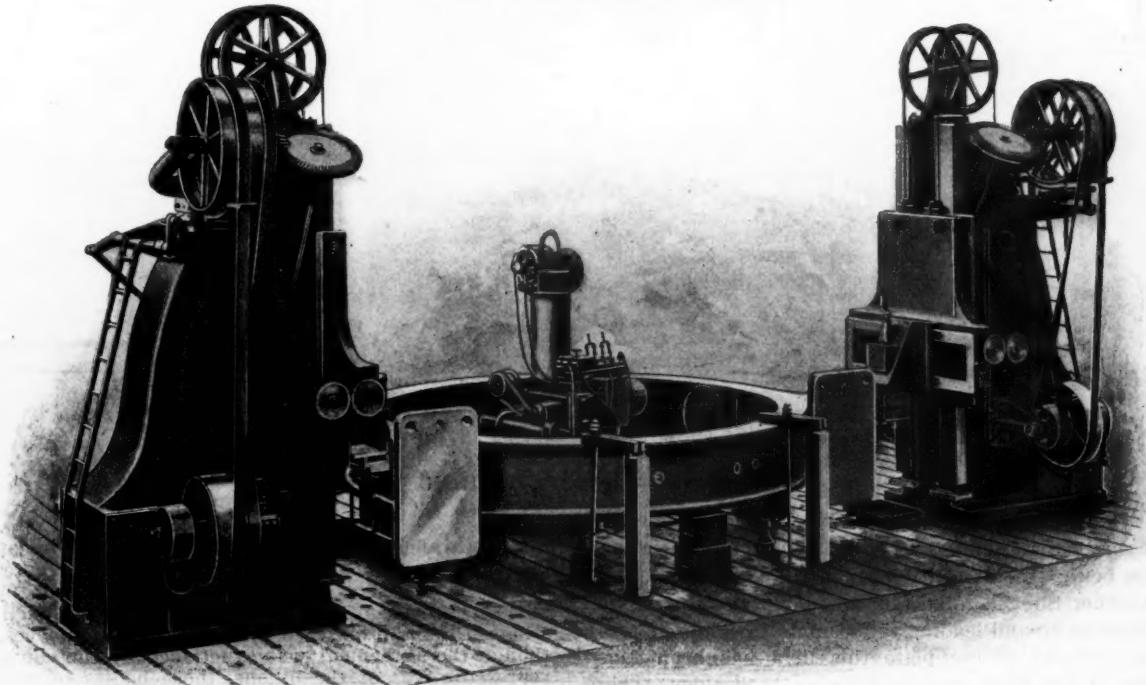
Newton Portable Slotting Machines.—Three Machines at Work Simultaneously on Same Piece.
